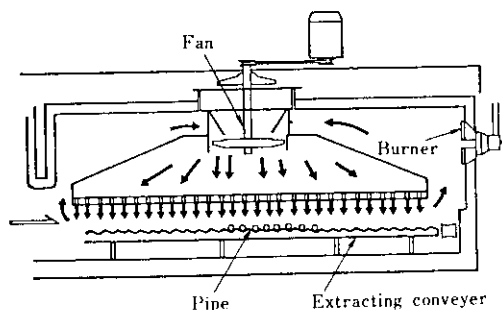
Recirculating fan of the soaking zone in the drawing furnace
